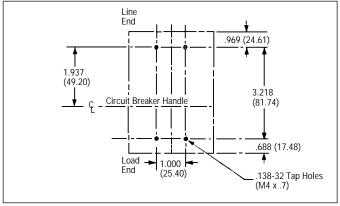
GMCP Mounting Bolt Drilling Plan
